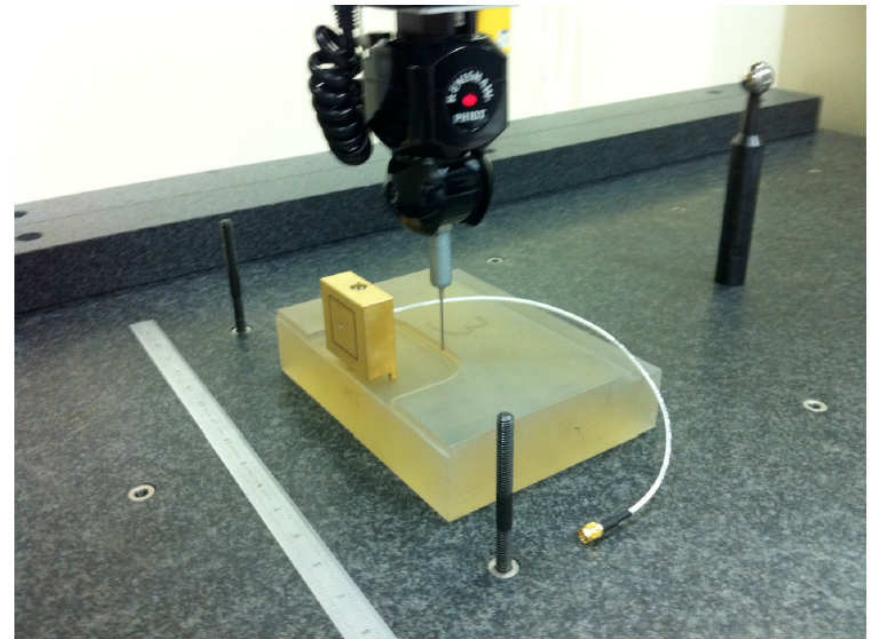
Test coupon and edge sensor block on the CMM machine for location measurement.
